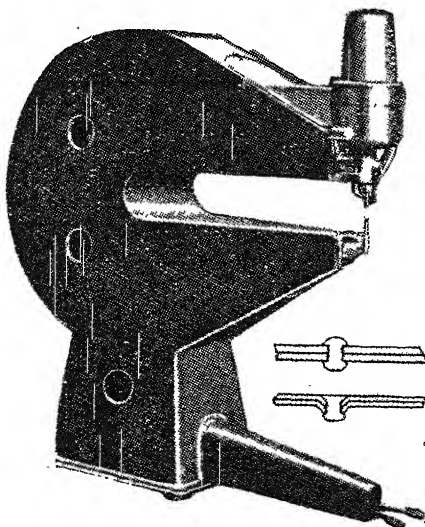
The Erco automatic machine for punching rivet holes, fitting and clenching the rivets.
